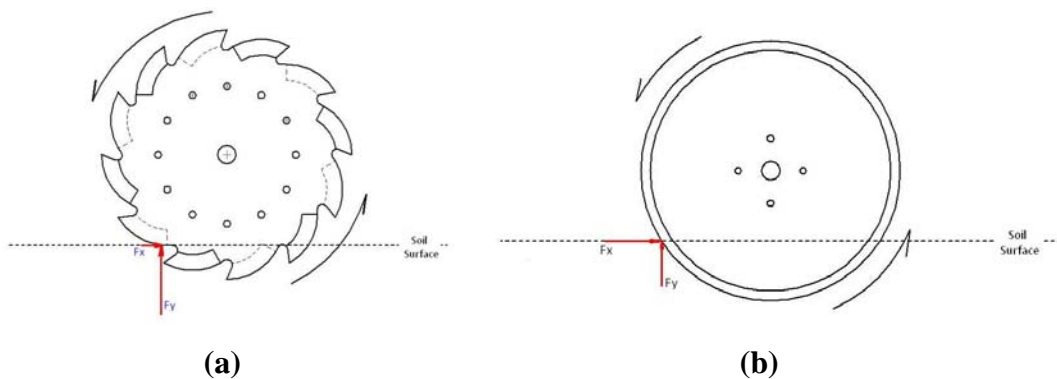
Coulters: (a) Toothed Coulter; (b) Plain Coulter
